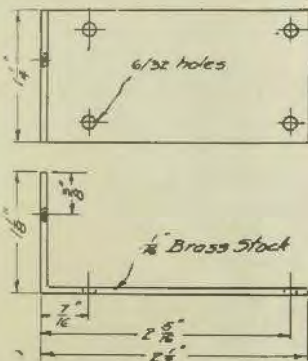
Bracket for Mounting Tube Socket, 1/16 in. Brass Stock
